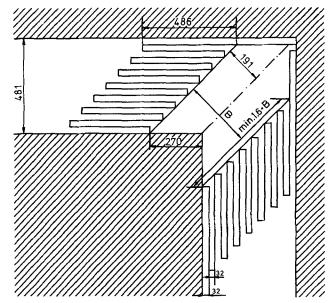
Corner compensation structure for a rectangular bent V-groove.
